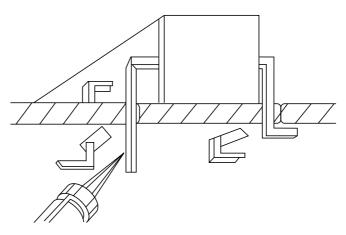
USE SOLDERING IRON TO PRY LEADS
